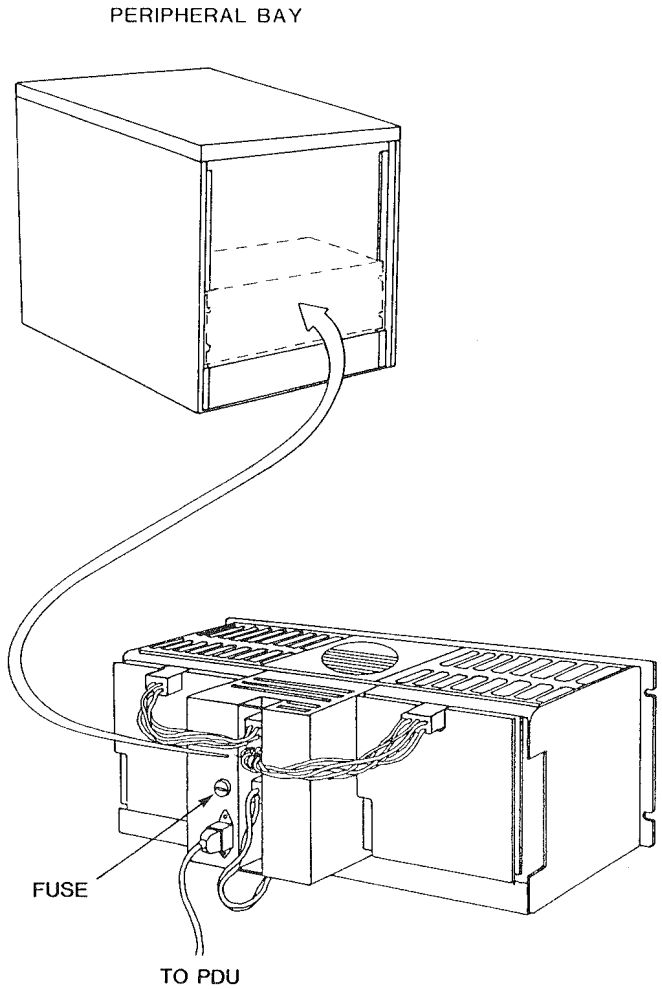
ICS3 POWER SUPPLY FUSE REMOVAL
